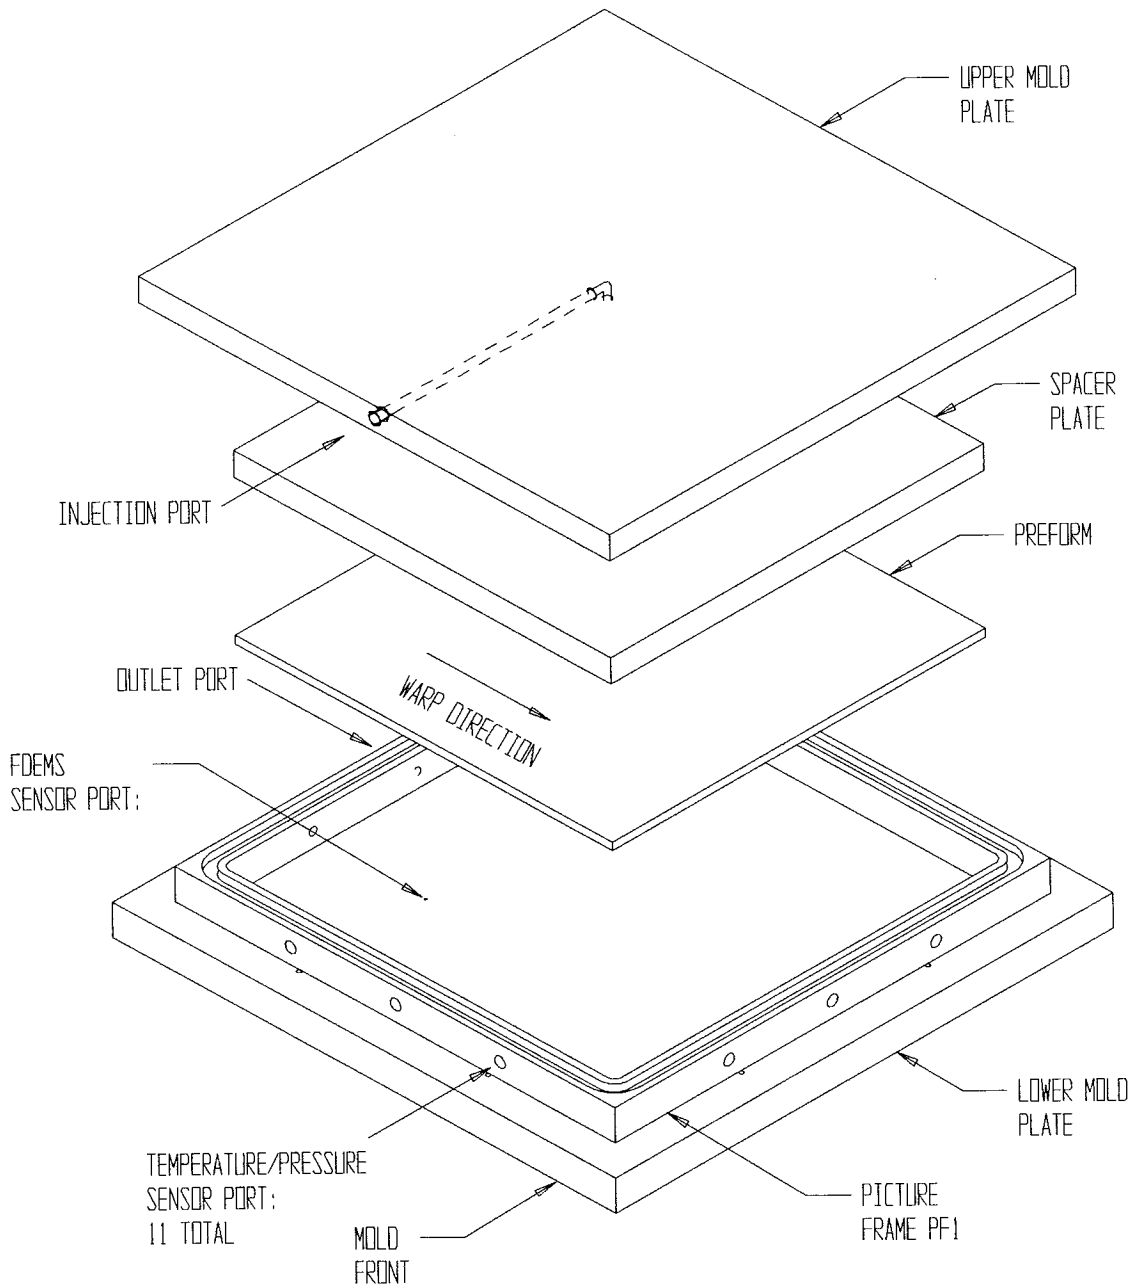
RTM mold, center port injection - picture frame PF1.
